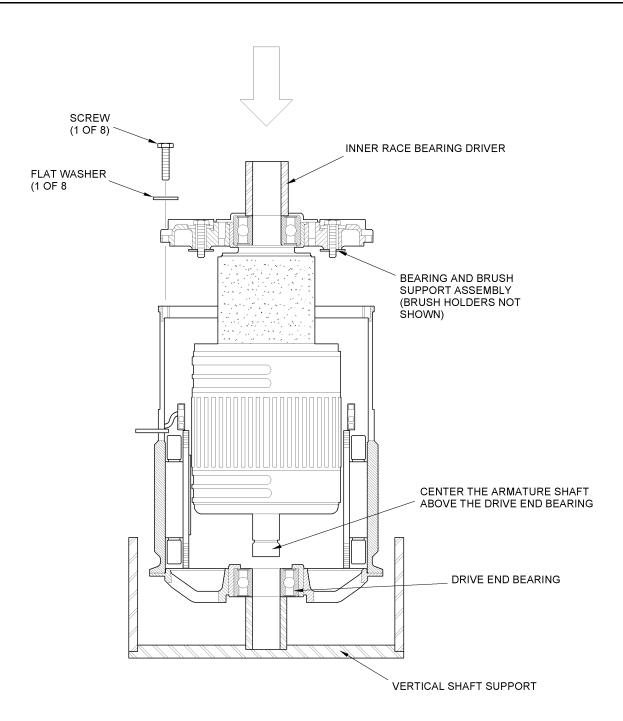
Pressing the Bearing and Brush Support Assembly with Attached Armature into the Stator and Housing Assembly (Pre-Load)
